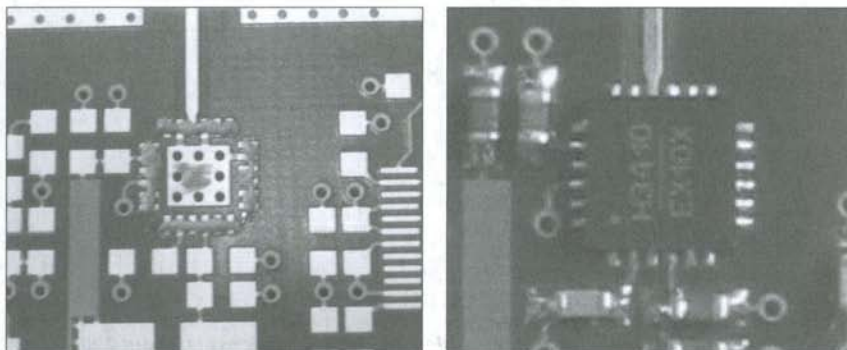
/b: Soldering of the QFN-24 package can be done with solder paste. A small amount is placed over all the pads (left side). The package is placed on the top of the paste and is soldered with hot air (right side)
